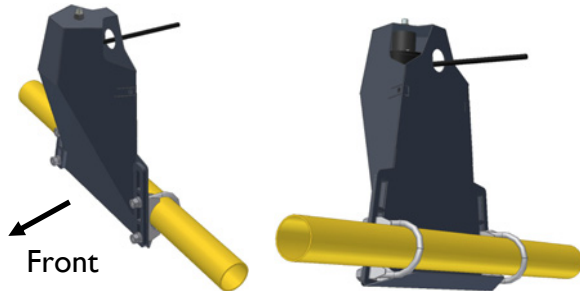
Low Profile Bracket Mounted with Exhaust Clamps
